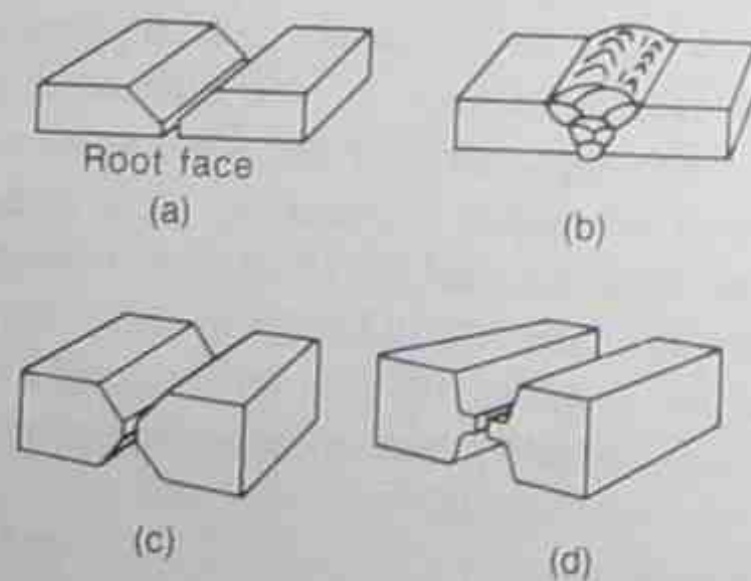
Various ways to produce a butt joint by welding.
